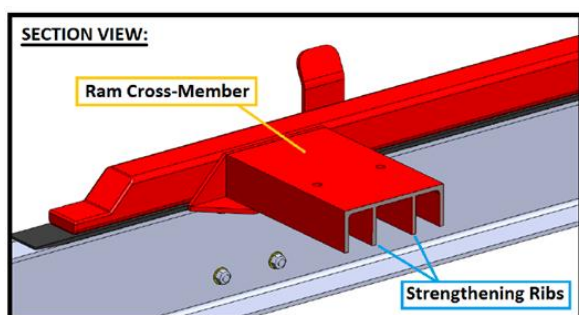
Cross Section of Ram cross-member w/ strengthening ribs
